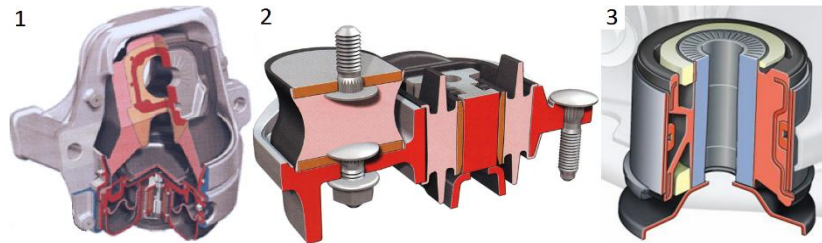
Types of mounts: passive hydraulic engine mount (HEM) with decoupling membrane (1), conventional rubber gearbox mount (2) hydro suspension bushing for rear sub-frame (3).
